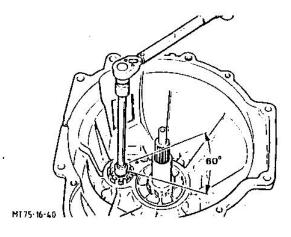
Tighten clutch release bearing guide sleeve with Special Tool 16-040.
